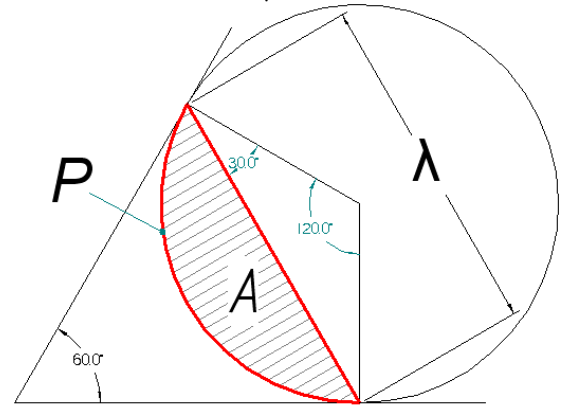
SCHEMATIC OF THREAD CLEARANCE GEOMETRY
